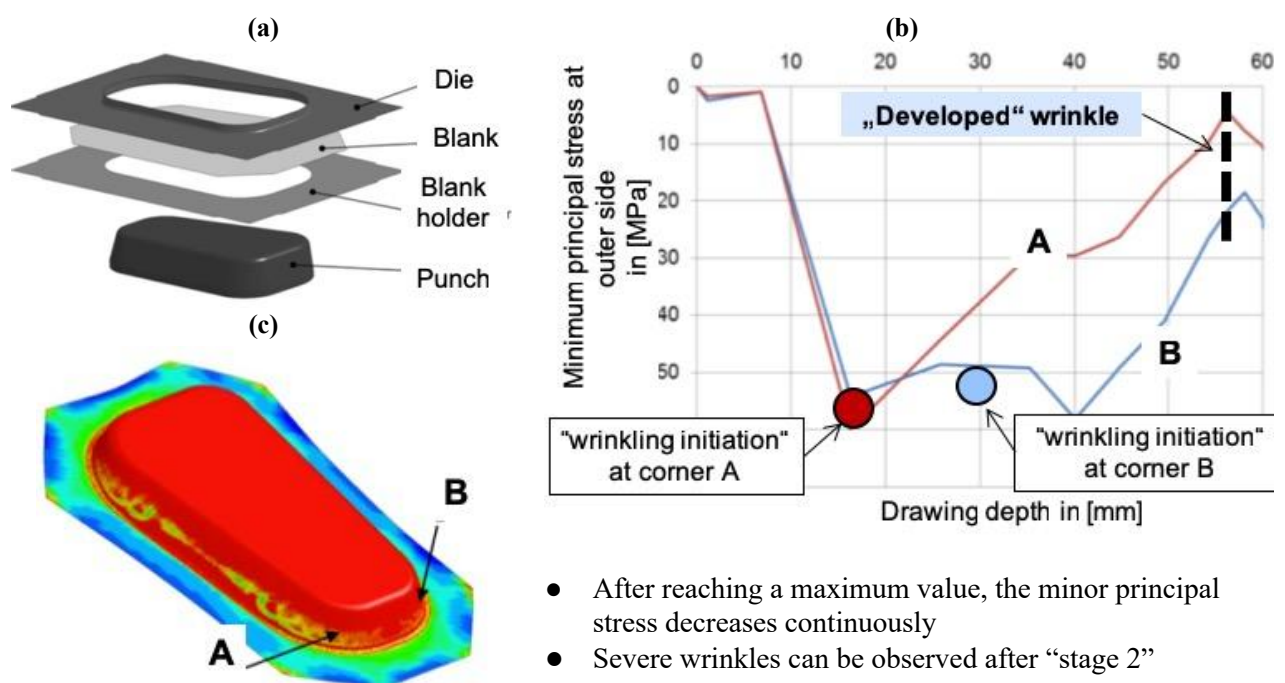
FEA for rigid blank holder with material HC340LA, sheet thickness of 1.0 mm: (a) FE model for deep drawing process using a rigid blank holder; (b) analysis of the stress conditions through investigation of selected elements at corner A and corner B of formed part [Ran15a]; (c) relationship between minor principal stress on outer side of investigated elements of corner A and corner B and deep drawing depth in the case of rigid blank holder [lie16]
